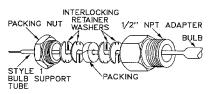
Part No. FTG13A-600R packing nut assembly.
